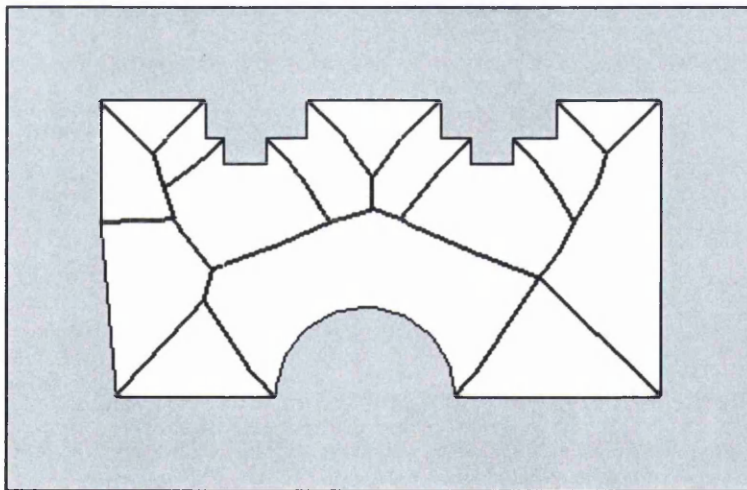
Medial axis for the Aluminium sand casting used in Example 2
